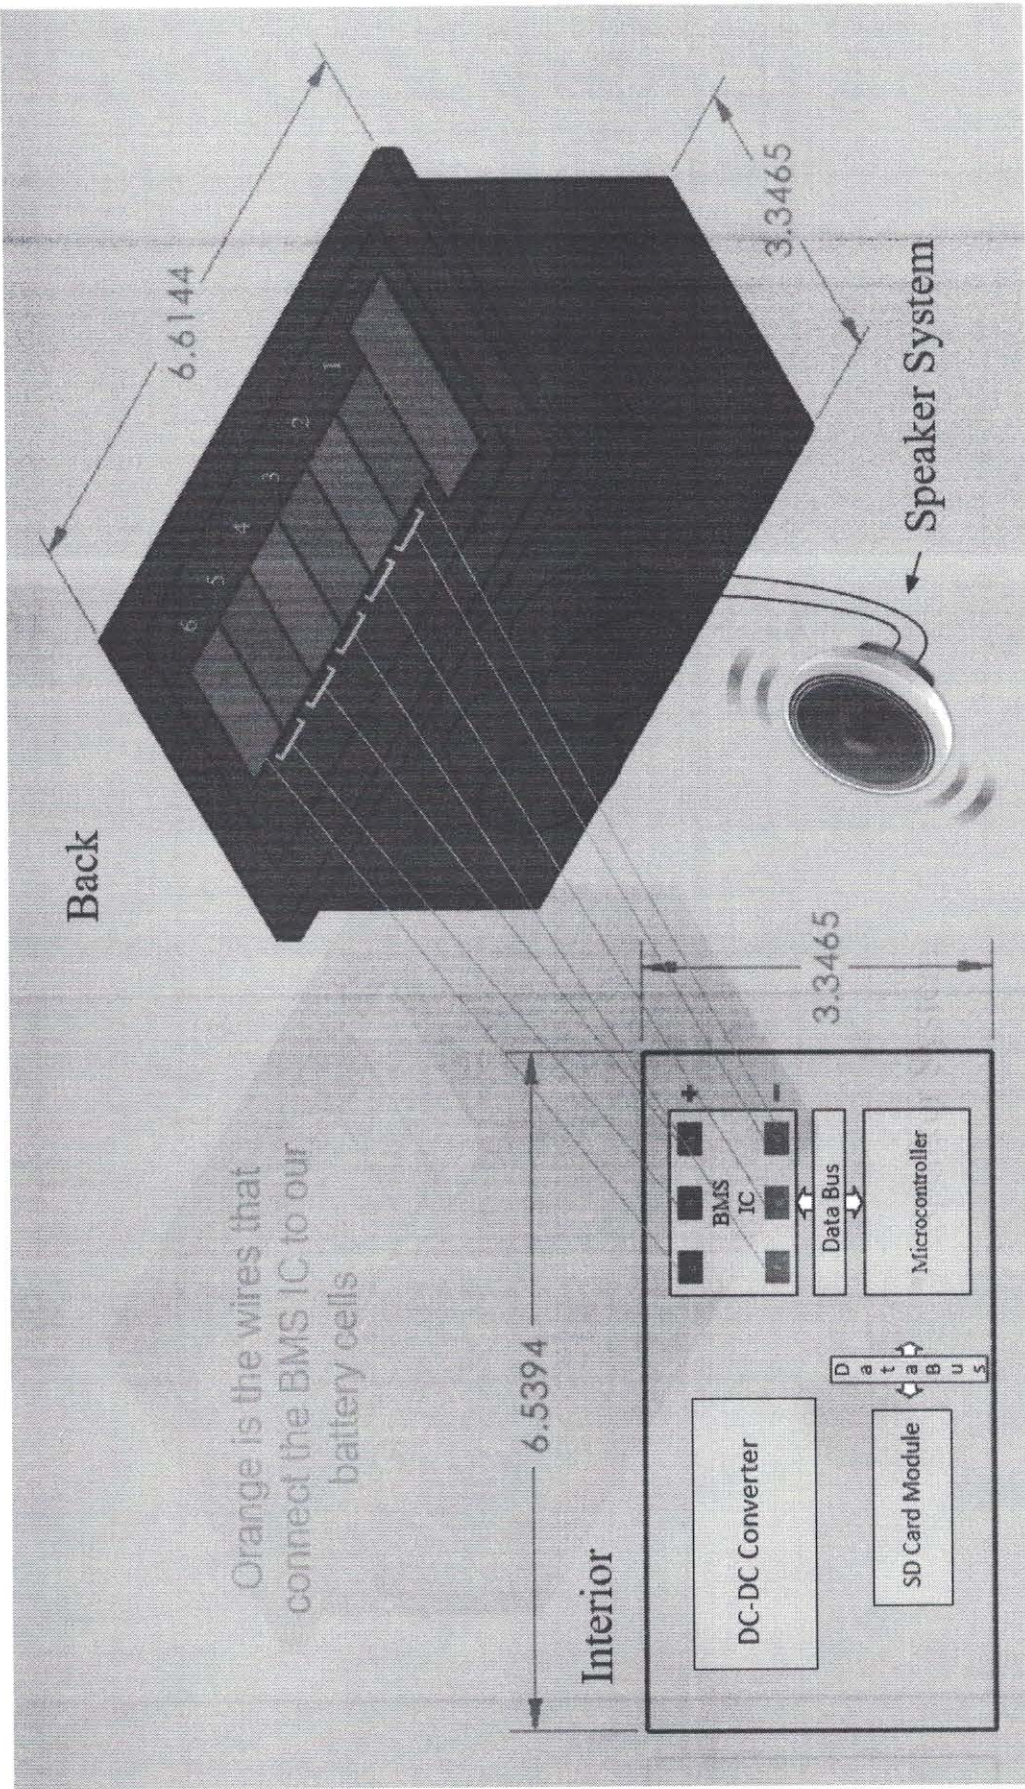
Back of device (measurement in inches) Showing interior where PCB is and parts of PCB and how the battery cells connect to the PCB
